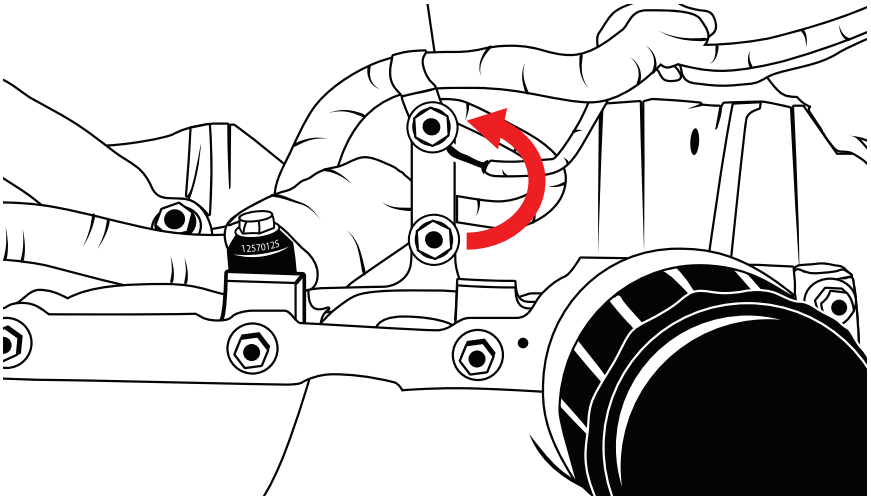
Relocate the Wiring Harness and Orient the Knock Sensor as Shown
